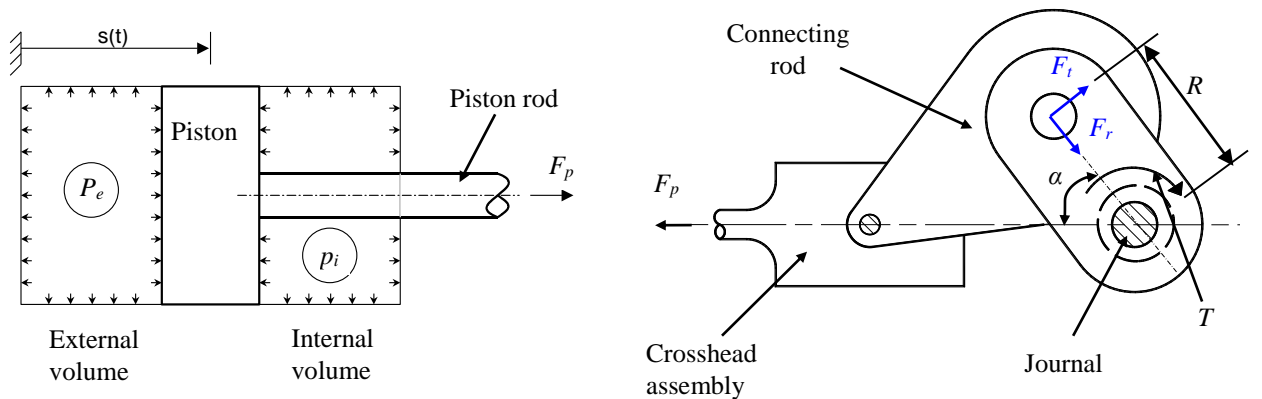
Simplified sketch of the cylinder (left) and section of the crankshaft, the connecting rod and the crosshead assembly (right).
